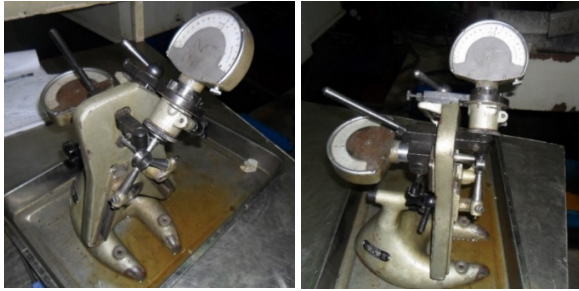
D022 type equipment to measure the oval of groove bottom diameter of the ball bearing's inner ring
